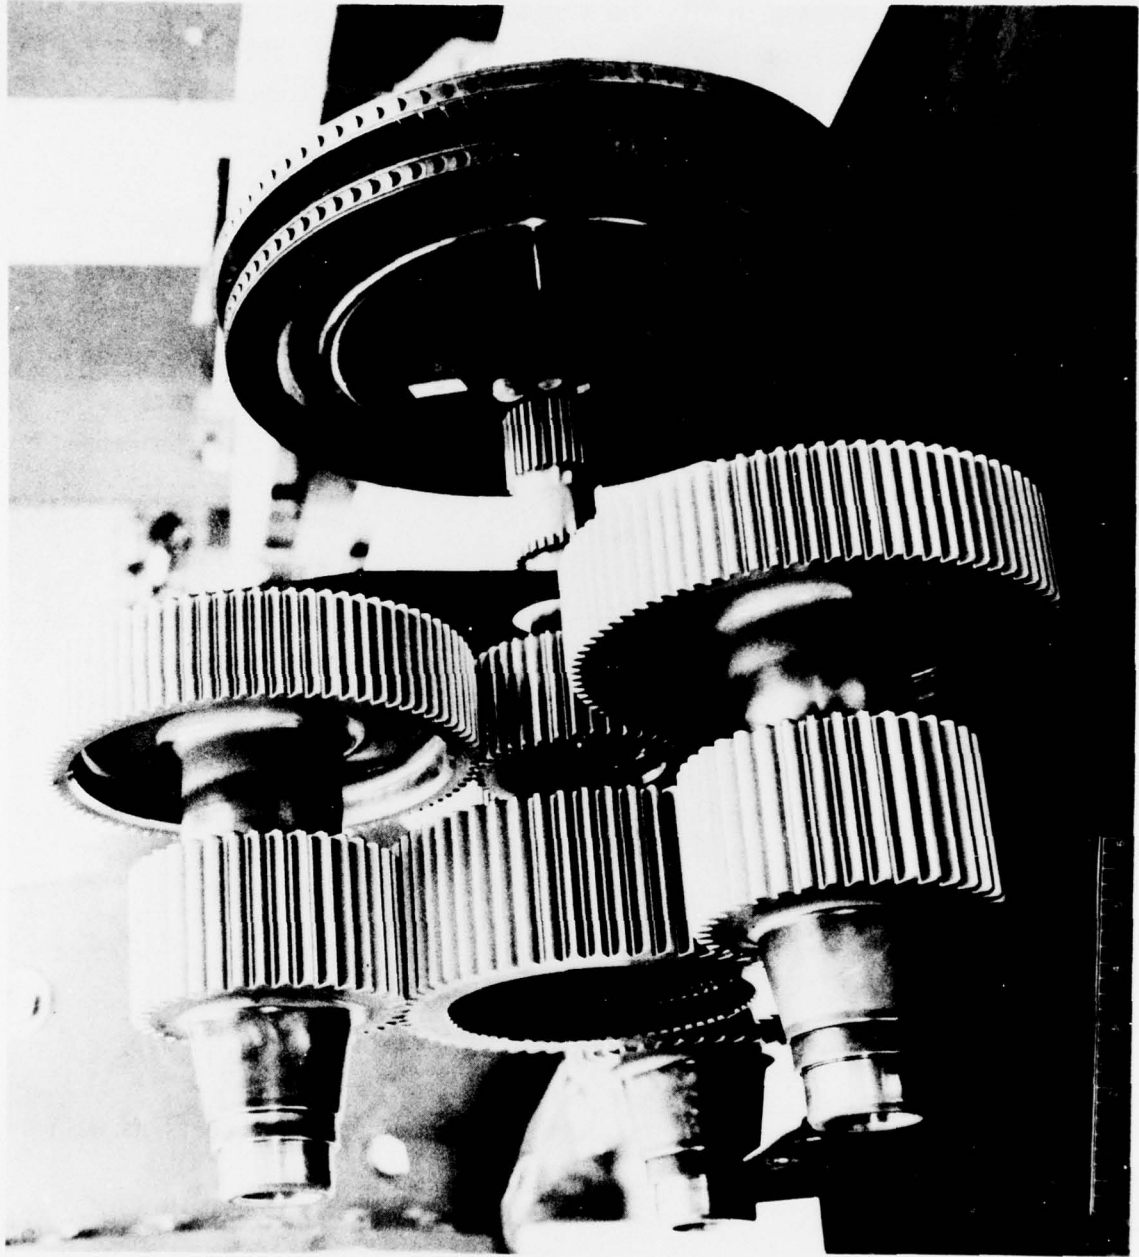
View of Gearing Arrangement for 3.2:1 Gearbox Used Between the Turbine and the Dynamometer
